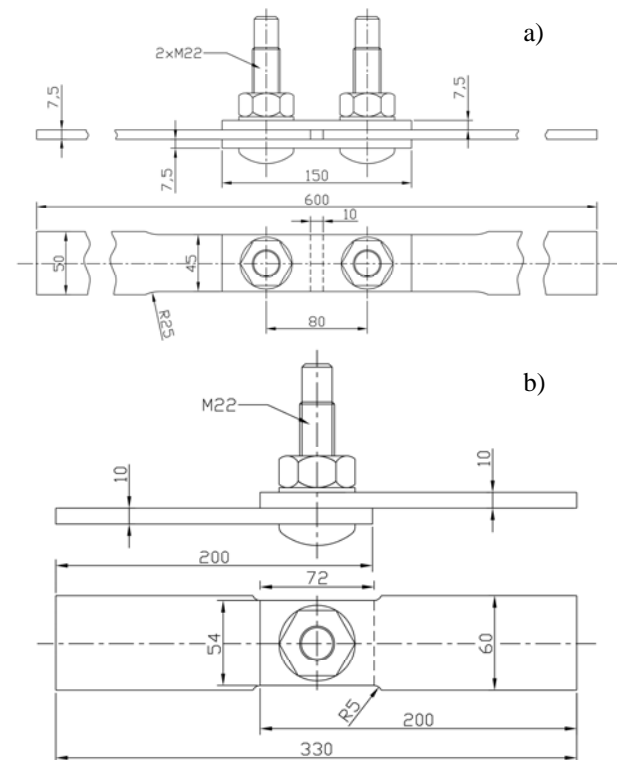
Geometry of the bolted joints considered in this study: a) double shear connection; b) single shear connection (dimensions in mm)
